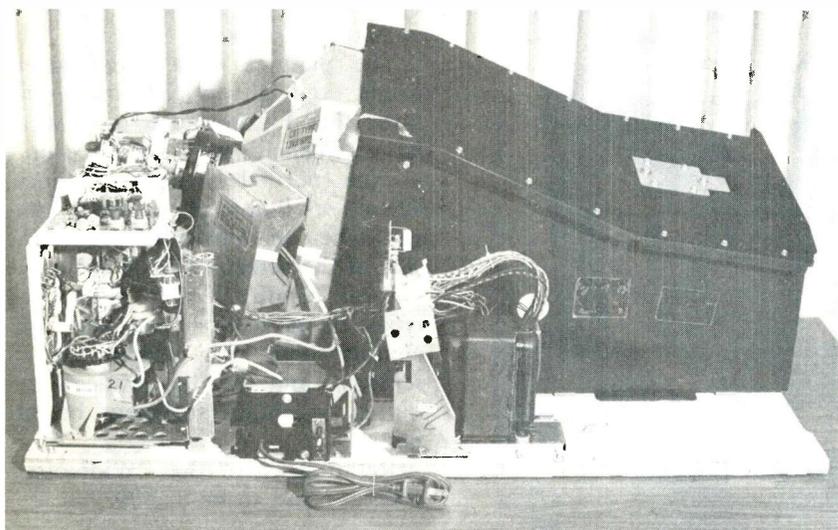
All of the chassis and picture-tube components (except the tuner assembly) are fastened to a mounting board. The board and components can be removed together for servicing. Notice the extensive radiation and high-voltage shielding.
